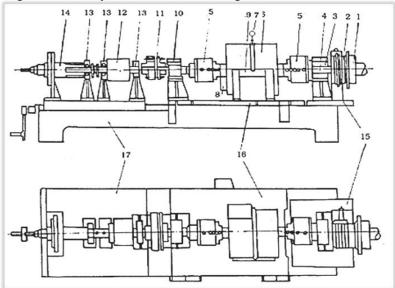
Installation for the determination of deformability through hot twisting 1 - flange coupling on the motor spindle; 2 - electromagnetic coupling; 3 - fixed bearing; 4 - axis; 5 - sample fixation bins; 6 - heating oven; 7 - pyrometer with radiation; 8 - thermoregulator with resistance thermometer; 9 - sample; 10 - mobile bearing; 11 - mobile coupling; 12 - safety coupling; 13 - fixed bearing; 14 - cooling moment measuring bar; 15 - fixed plate; 16 - flapper; 17 - framework.
